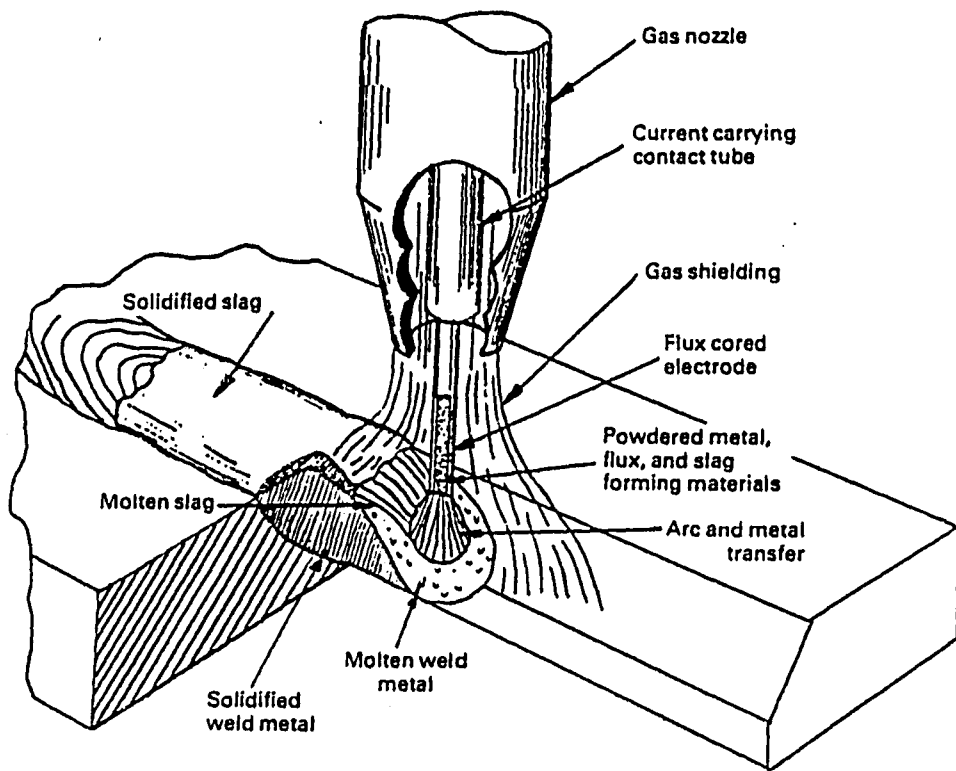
Gas-shielded flux cored arc welding. (2)
